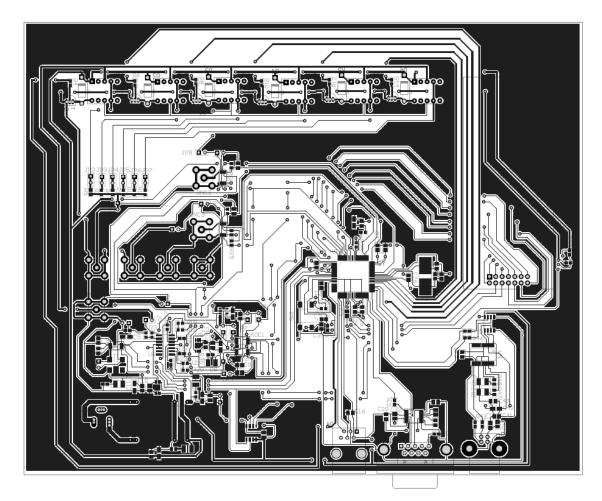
Layout of the PCB of the entire system - top layer.
